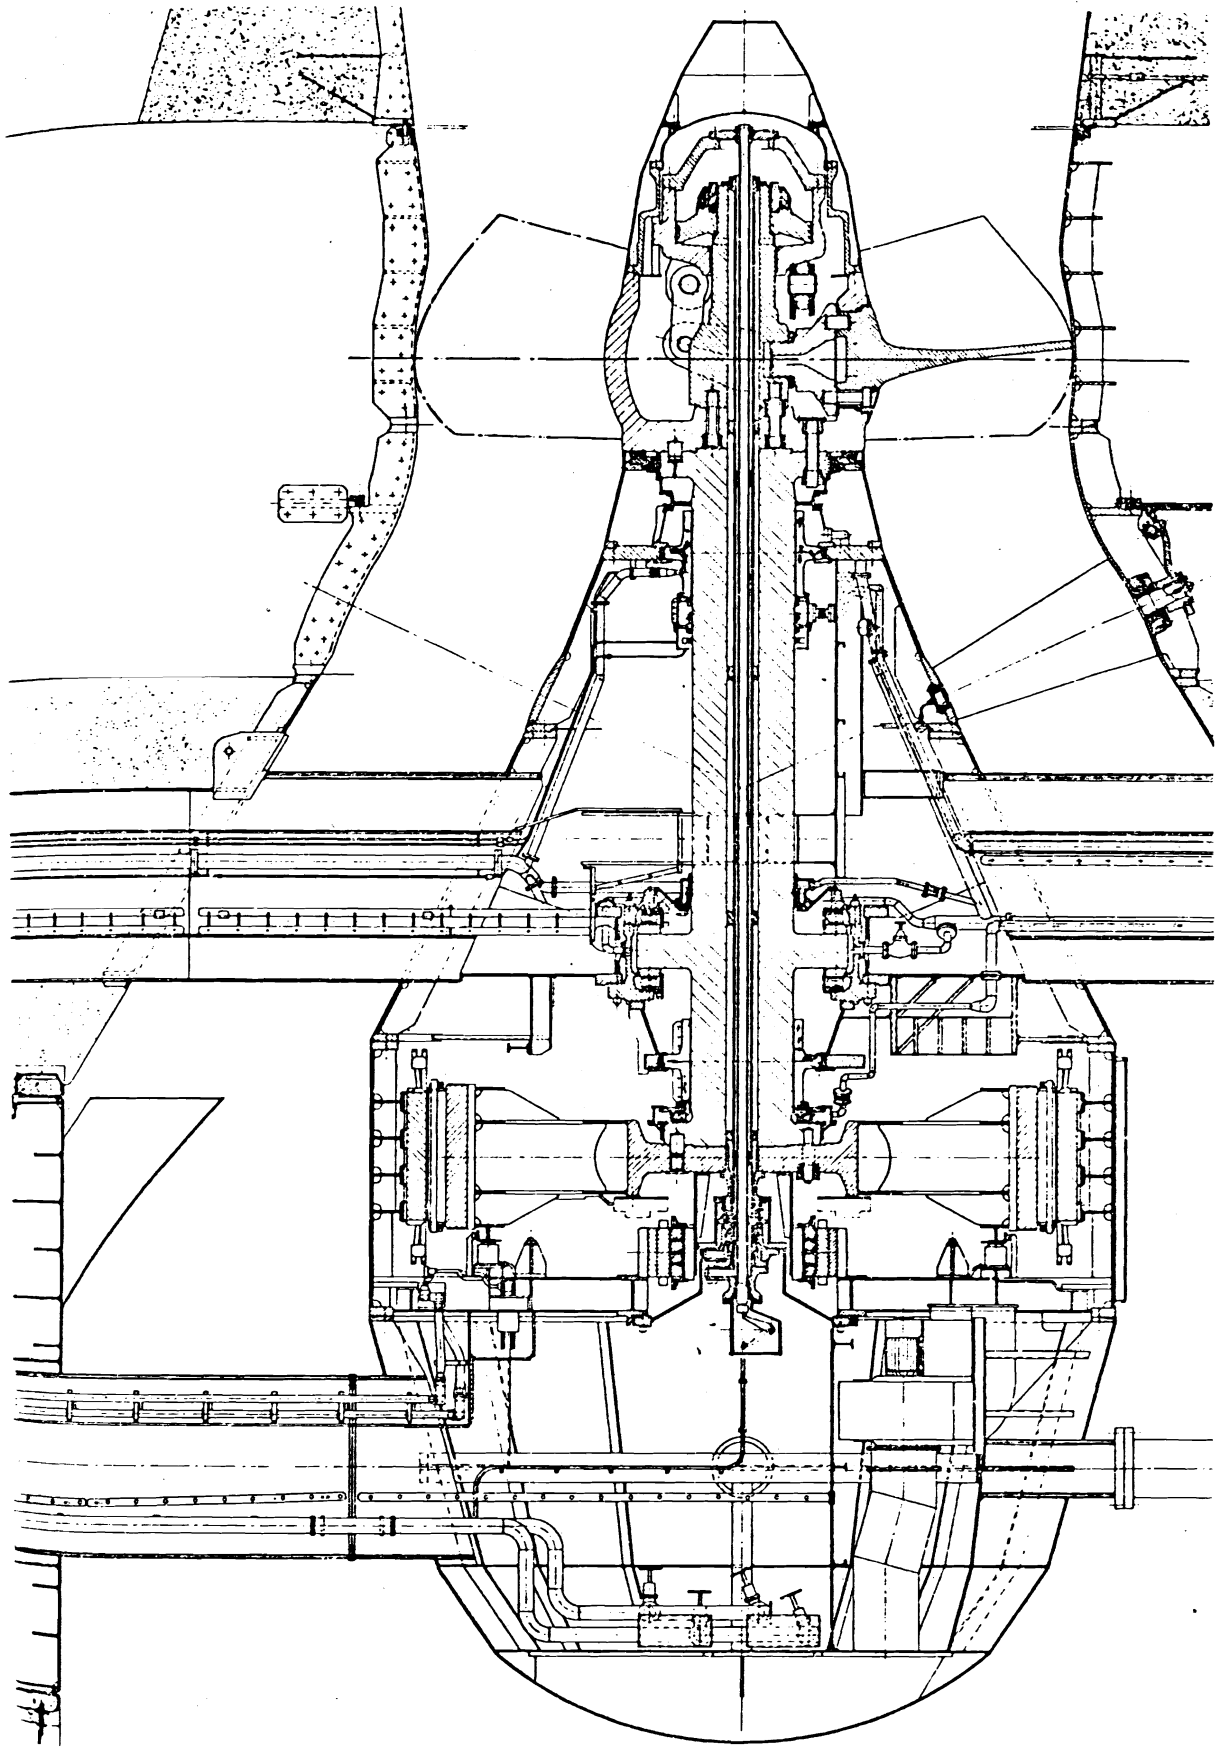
Longitudinal section of horizontal bulb turbine (owner Electricidade de Portugal) $H=12,3$ m; $n=83,3$ rpm; $P=43$ MW. Runner $D=6,8$ m. Neyrpic design. 2 radial bearings, alternator rotor overhung. Runner servomotor with piston bolted on the hub by screws. Oil head on the free shaft end. Assembly of the generator through the draft tube and a bore at the turbine end of bulb. Access to runner by axially split draft tube crossing a trench in the power house. (Drawing courtesy Neyrpic, Grenoble, France)
